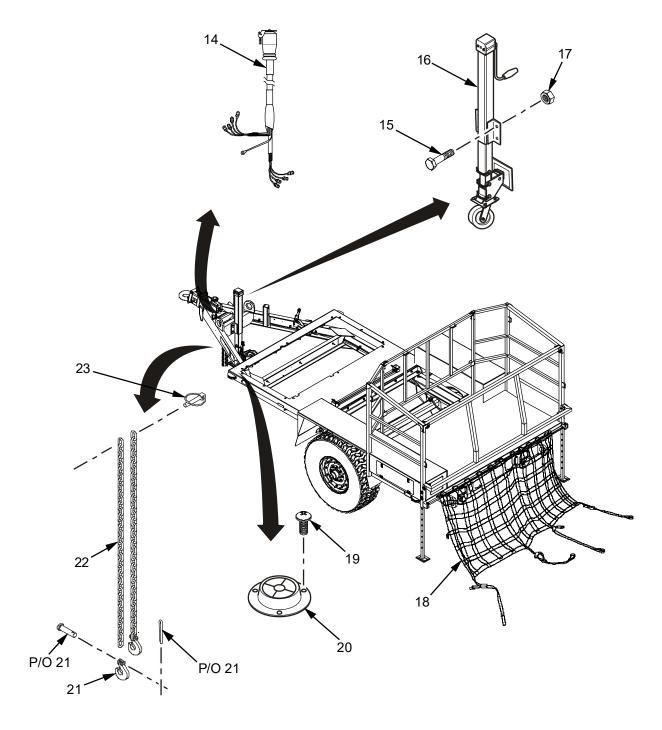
Chassis Frame Assembly, T211125G Green, T211125T Tan (Sheet 2 of 5)
